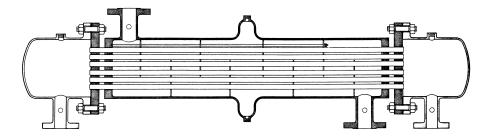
Line drawing of a standard type of shell and tube heat exchanger (courtesy of Patterson-Kelley Co.)
